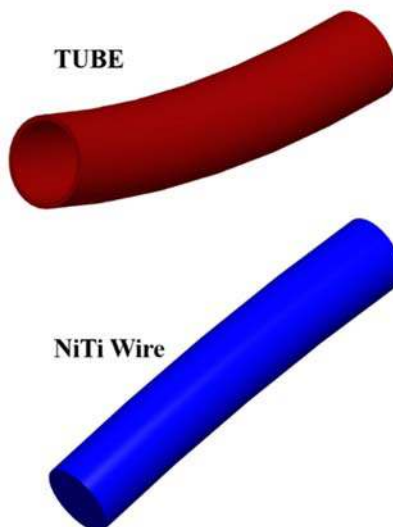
Initial memorized shapes of the nitinol wire and tube assembly.
